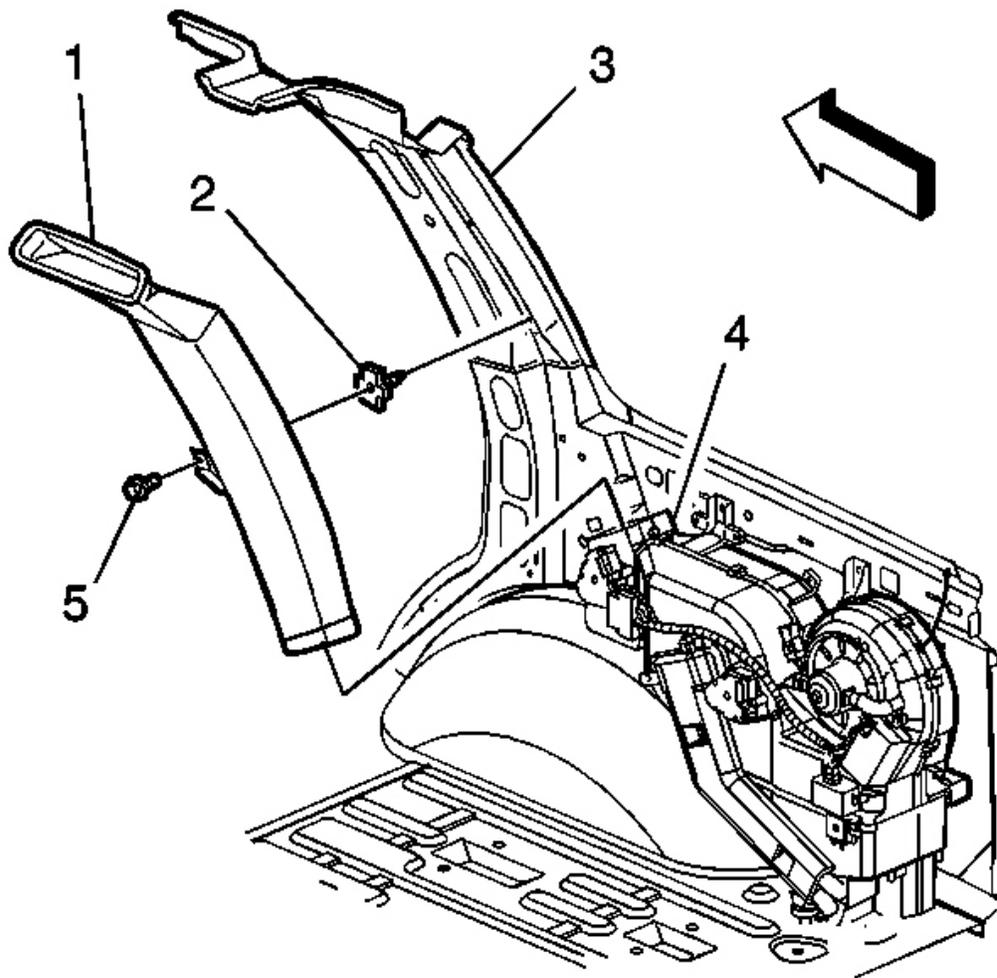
View Of Upper Auxiliary Air Duct & Fastener (Tahoe/Yukon)
